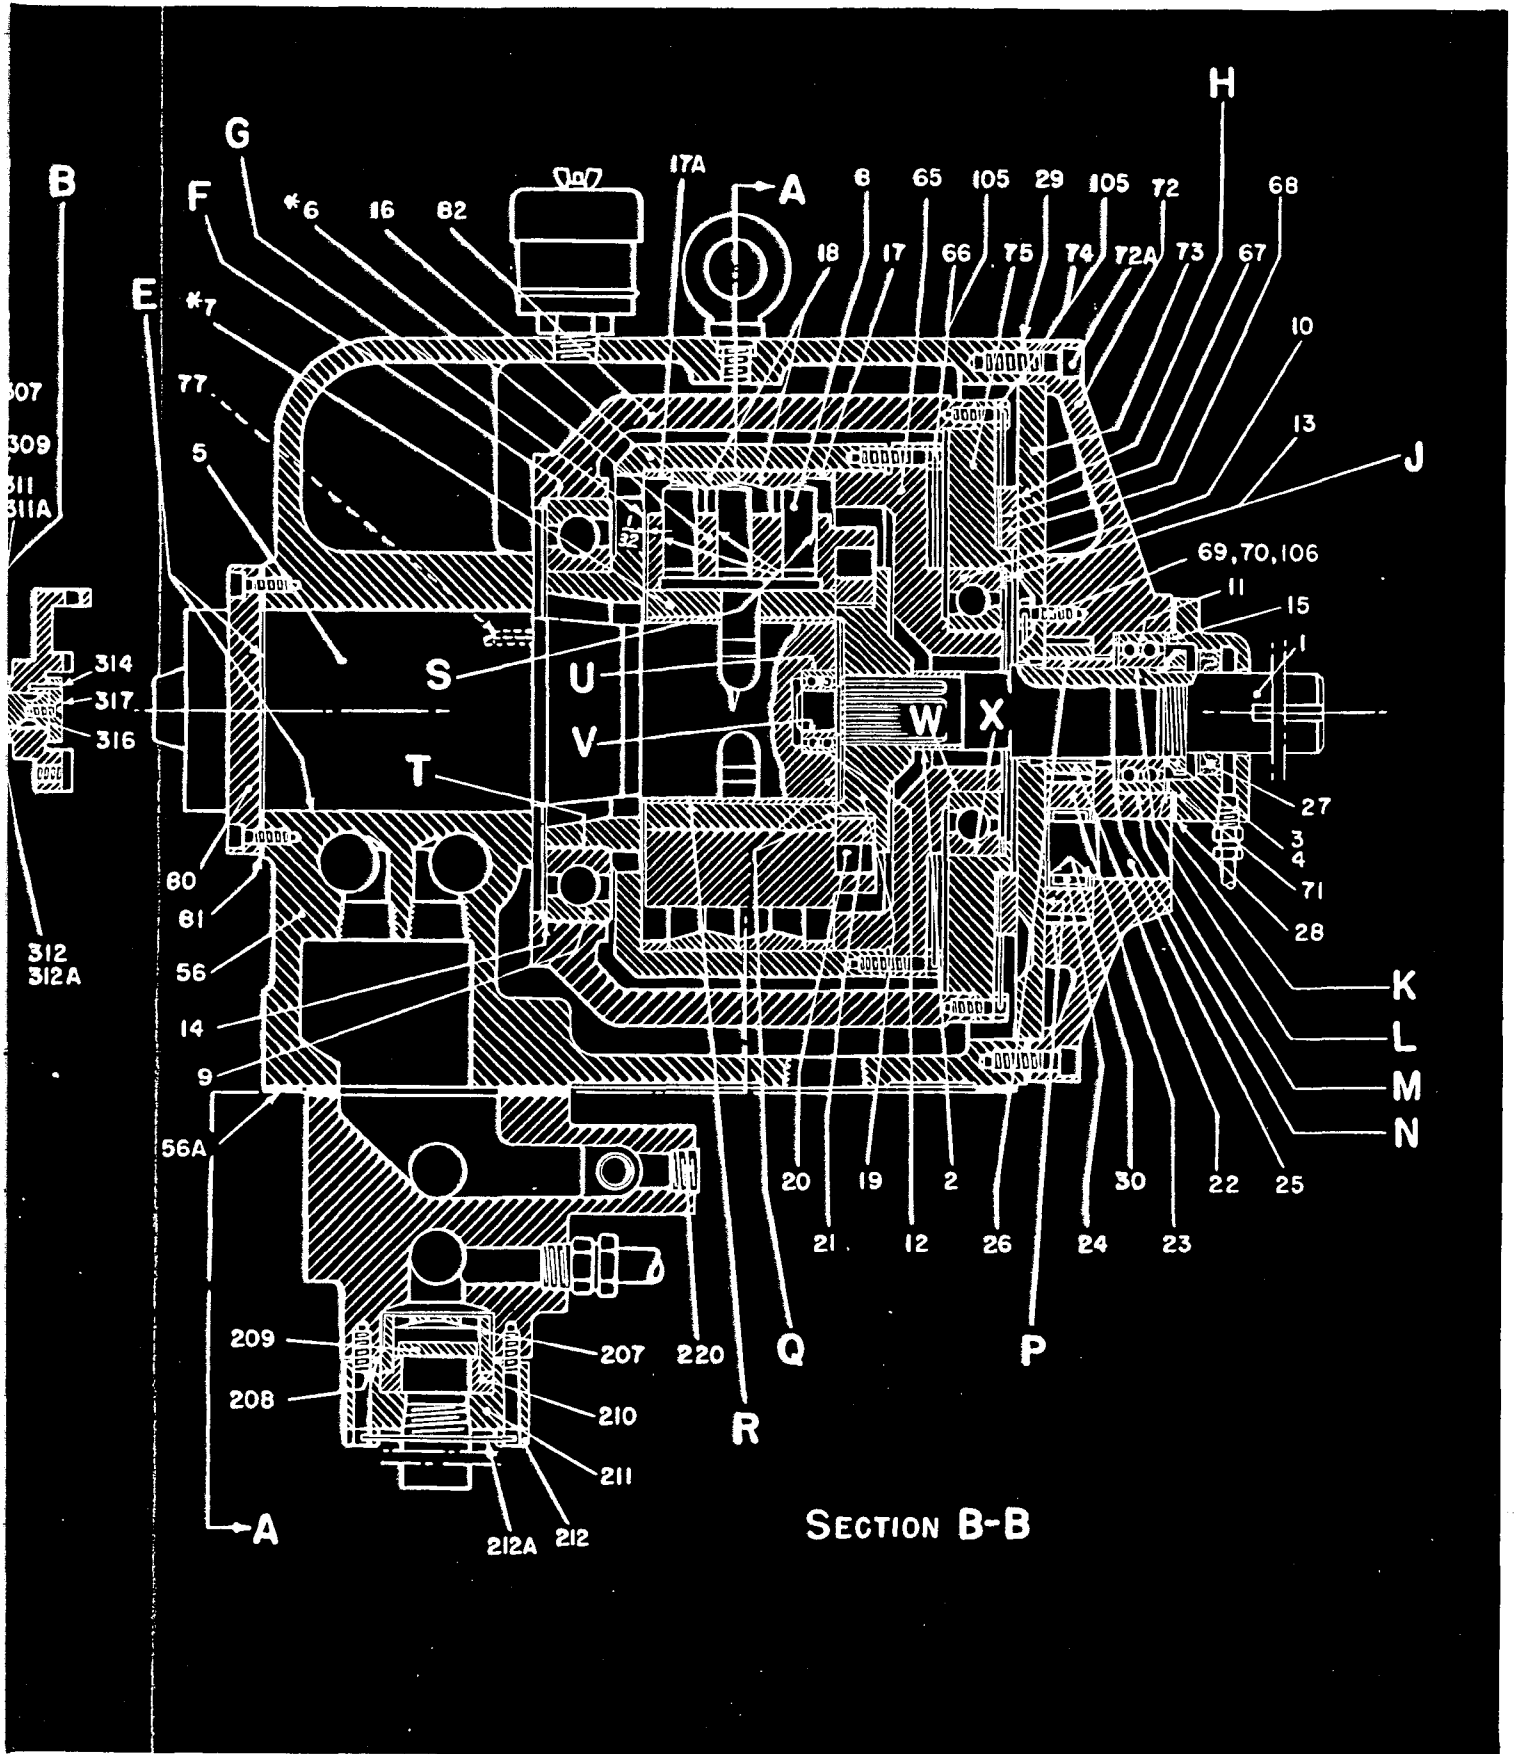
Parts Drawing of Type "DH" Pump (also see Figs. 13 and
